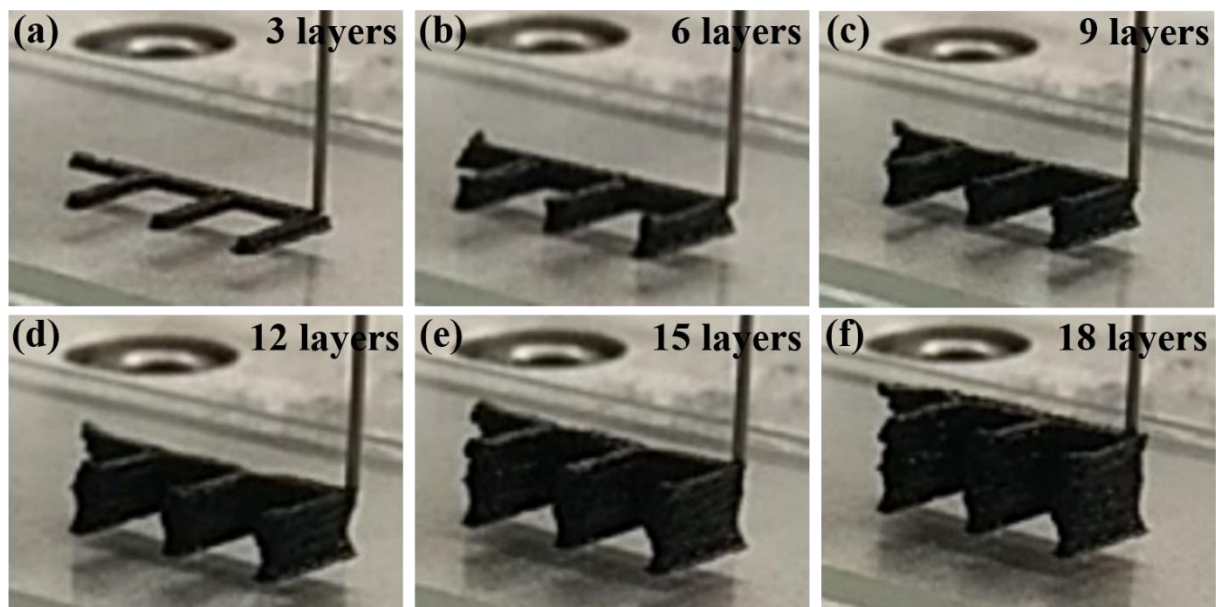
The 3D printing process of cathode part with CNF/LFP ink.
